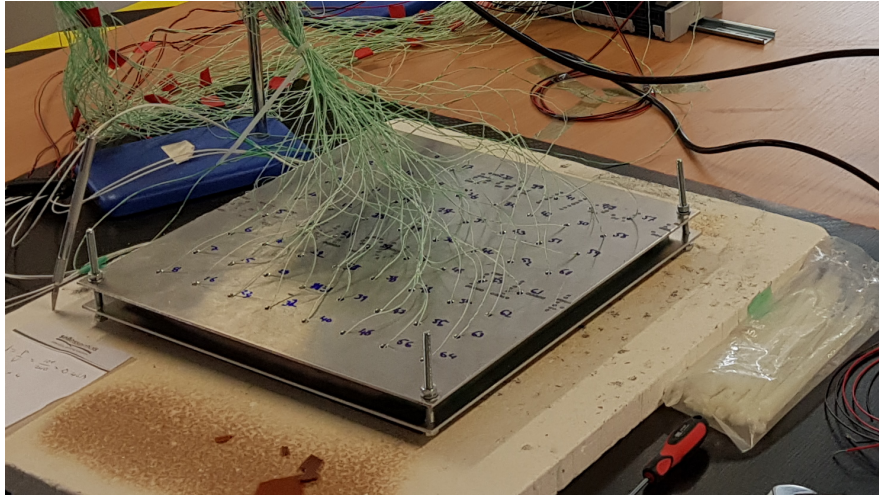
Experimental setup of RTD array contained within the plate tool prototype of Airpad array tool.
